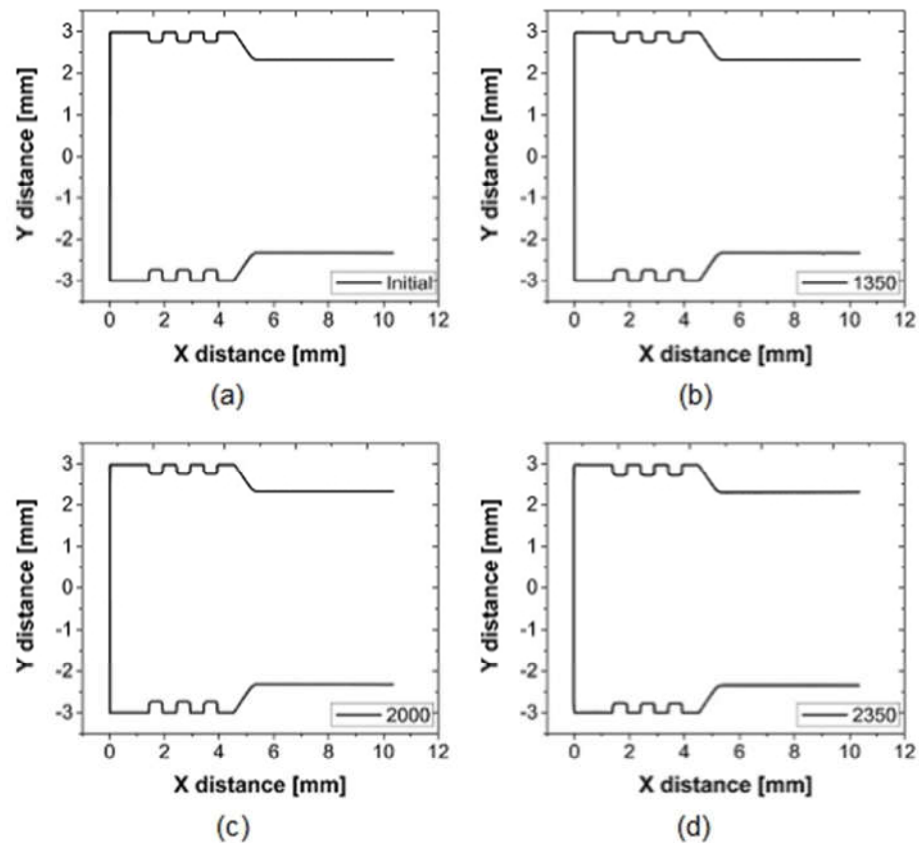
Pin's profile along welding cycles: (a) as-received pin condition (b) after 1350, (c) 2000 and (d) 2350 welds performed.
